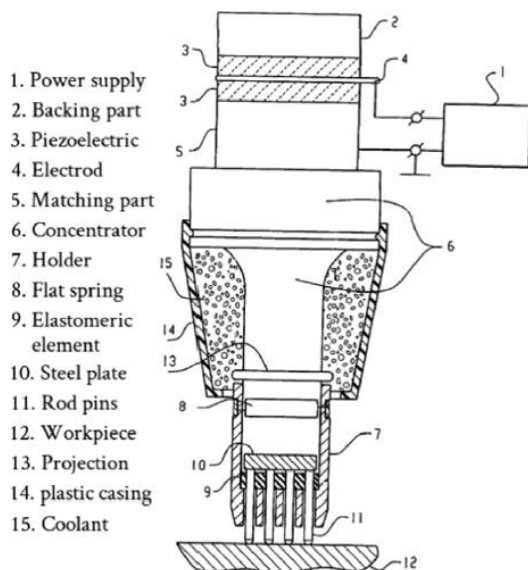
Schematic drawing on a HFNP tool for surface and subsurface treatment [1].
